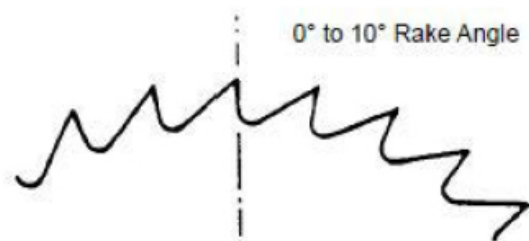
Typical saw Blade for Cutting AVONITE Flex Sheet
